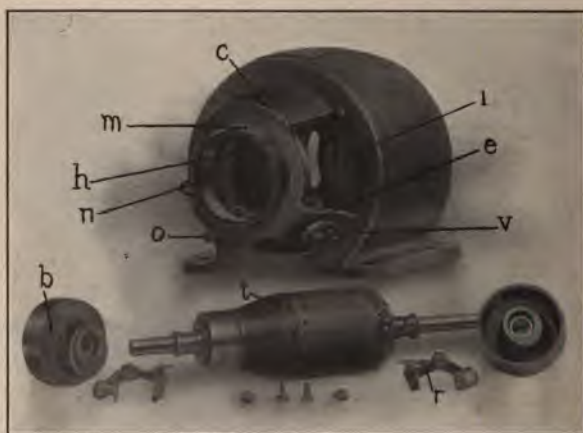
Parts of Bipolar Generator shown in Fig. 51.
